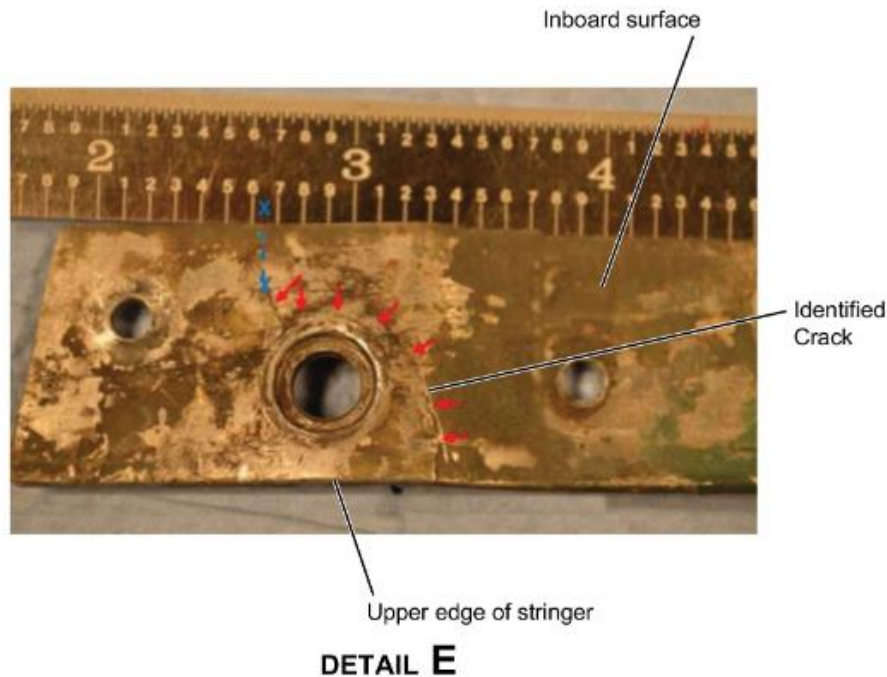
Horizontal Stabilizer Inspection (Sheet 2)
